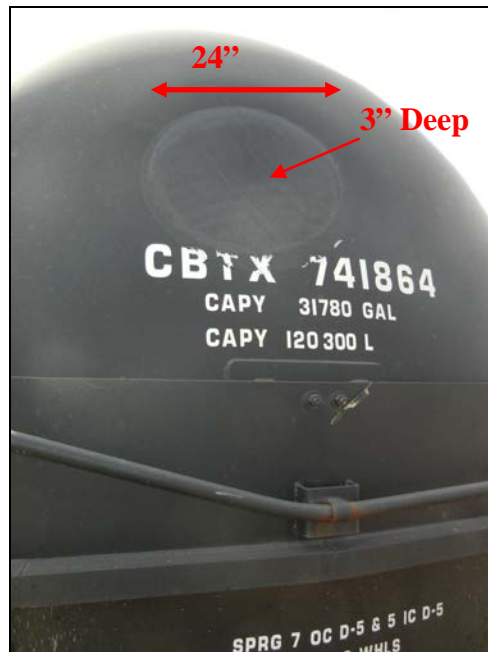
Head impact above half-height head shield (A-end) on CBTX 741864
